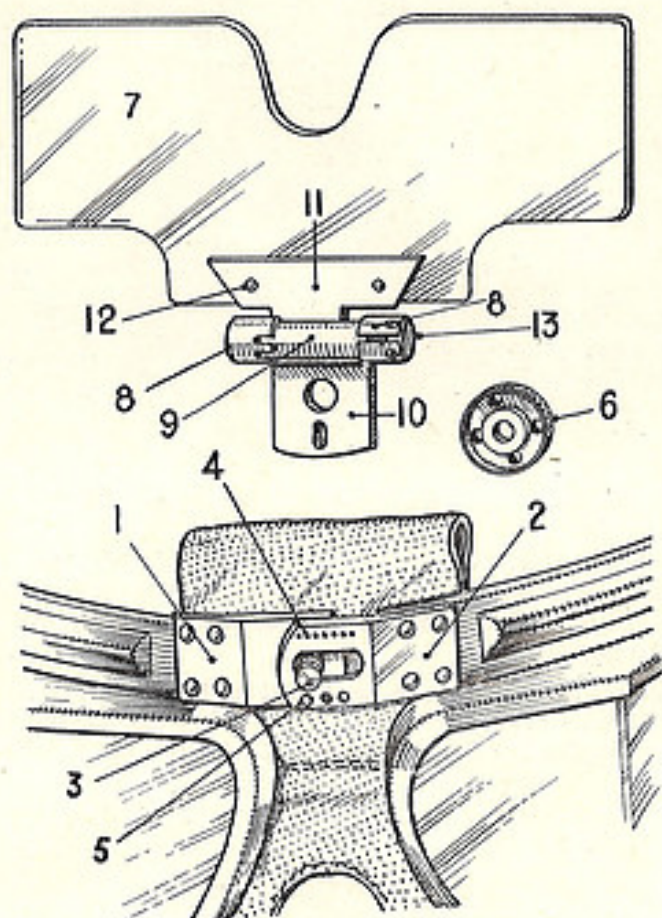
BRIDGE ADJUSTMENT AND VIZOR ATTACHMENT
